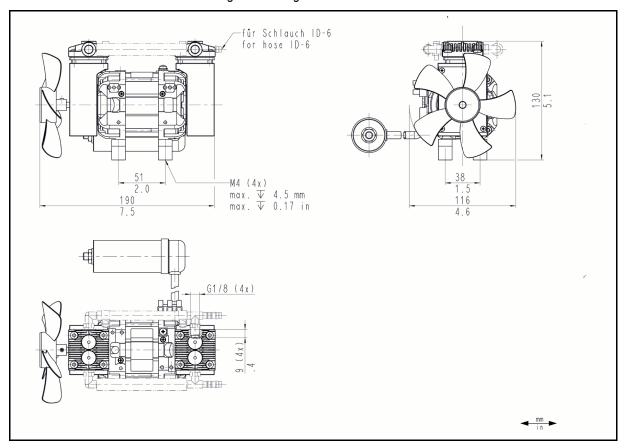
Mounting dimensions NPK09.1, NPK09.2, NPK09.1.2
